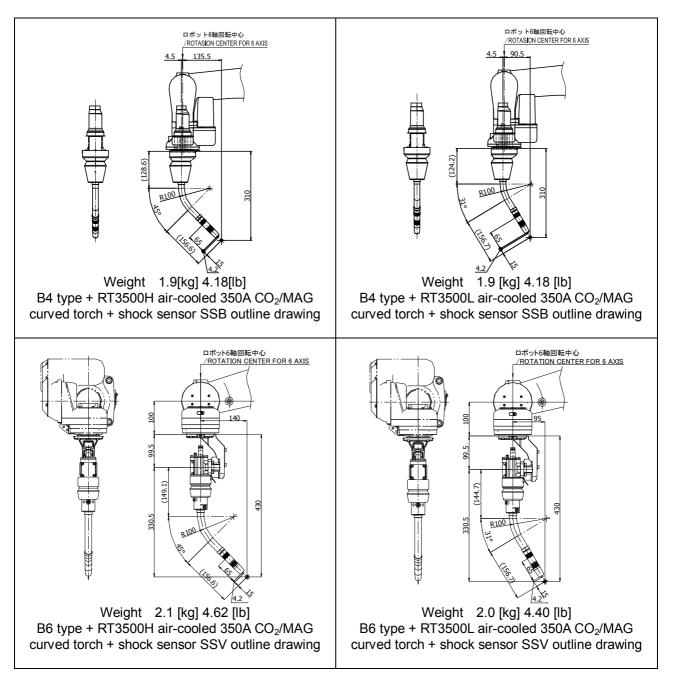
Outline drawing of air-cooled 350A torch (for B4 type, B6 type) Unit (mm)
